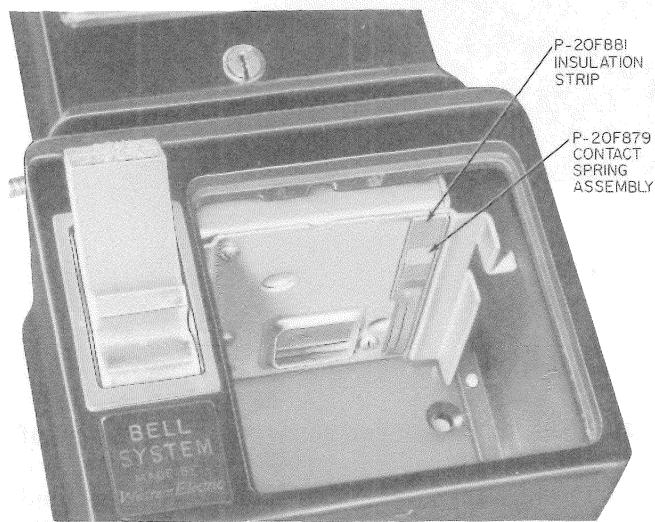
Installation of Insulation Strip and Contact Spring Assembly
